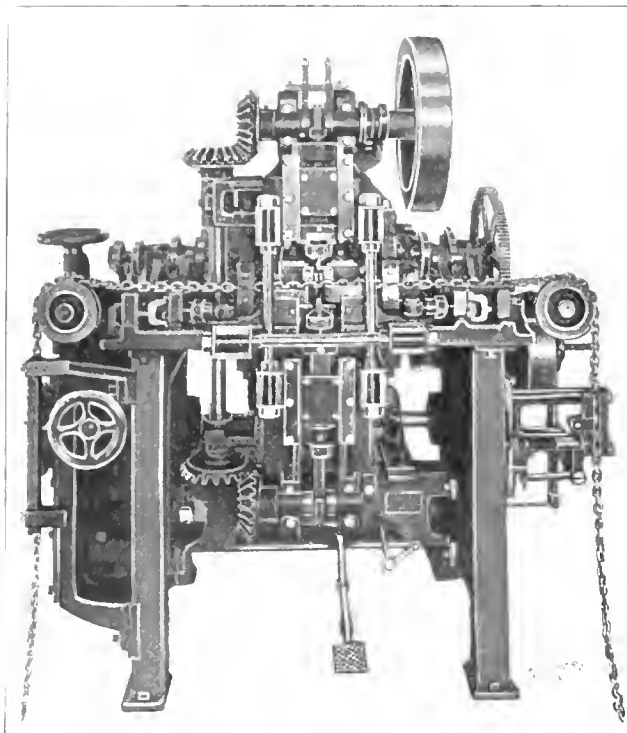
Front View of Automatic Machine for Welding Chain Links.
